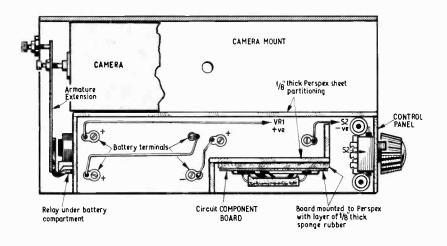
Layout of the triggering unit showing the battery positions and component board
